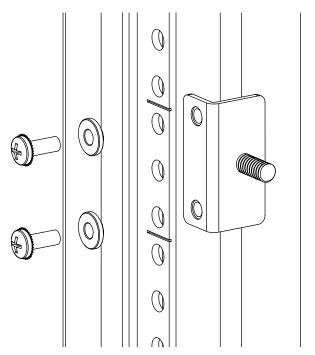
Installing the Rear Mounting Brackets (HP System/e Rack-Left Rear Upright)
